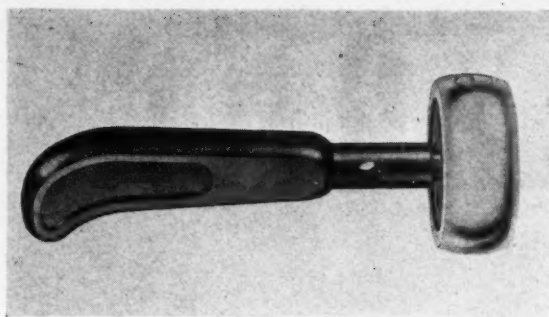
"TeBo" Bore Gage with Spherical Head Brought out by the Standard Gage Co., Inc.
